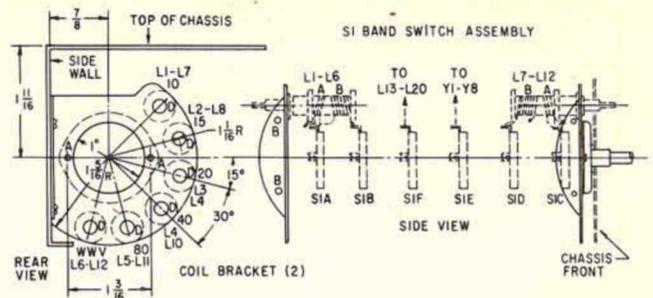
BANDSWITCH ASSEMBLY, showing the positions of the switch wafers and coils. The brackets on which the RF coils (L1 to L6, and L7 to L12) are mounted are cut as 2 5/8-inch diameter circles from 1/16-inch thick sheet aluminum, then drilled, trimmed and bent as shown.
